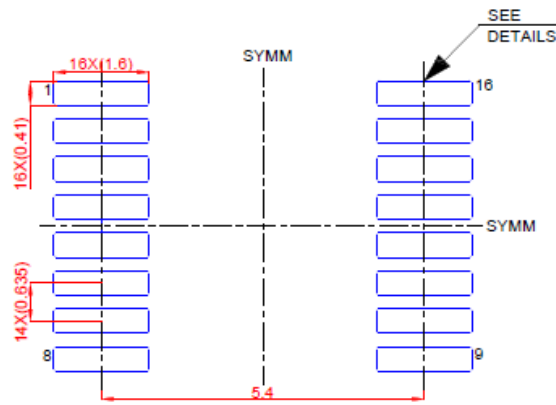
SSOP16 Package Shape and Dimension in millimeters
